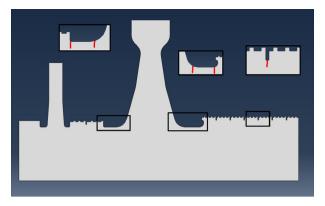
Typical locations of fatigue cracking in impulse turbine rotors.
